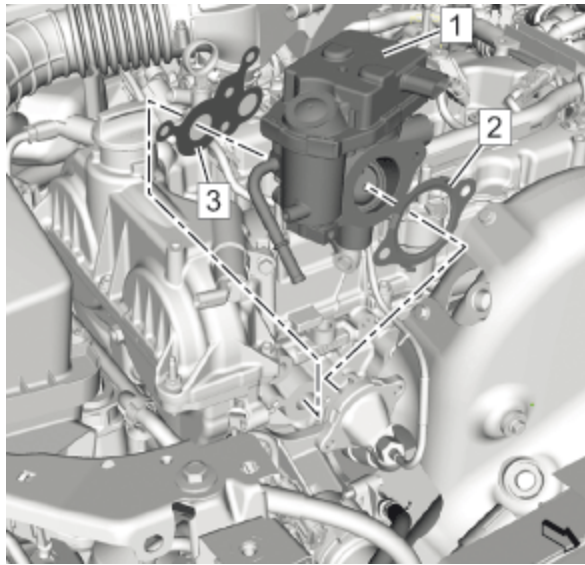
Exhaust Gas Recirculation Valve And Gaskets
